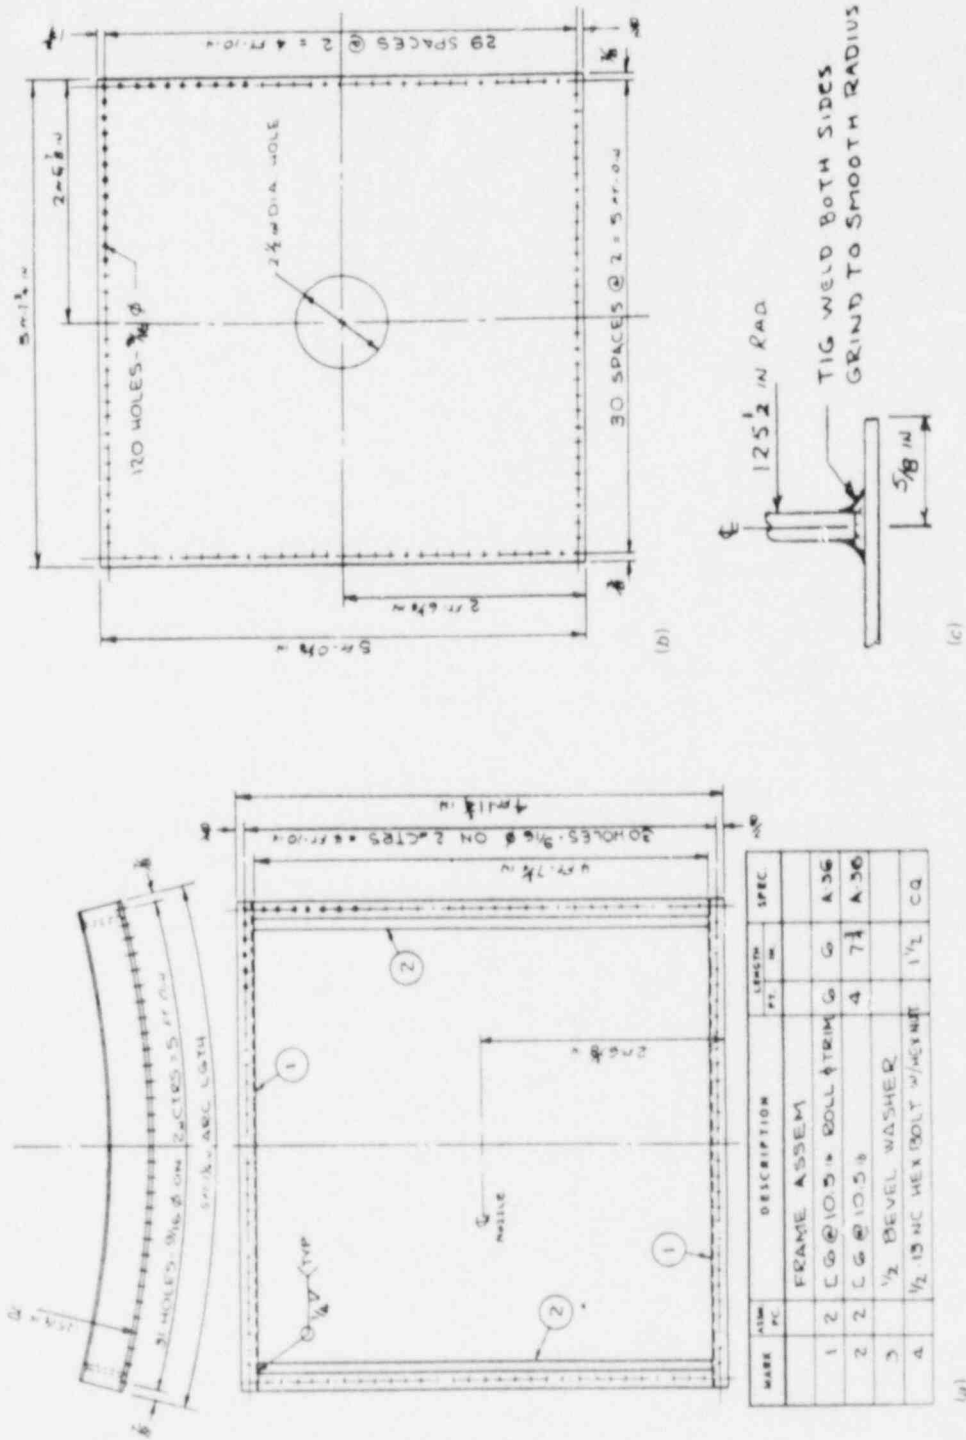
Test model CBI-3. (a) Frame assembly, (b) shell plate, (c) weld detail.
